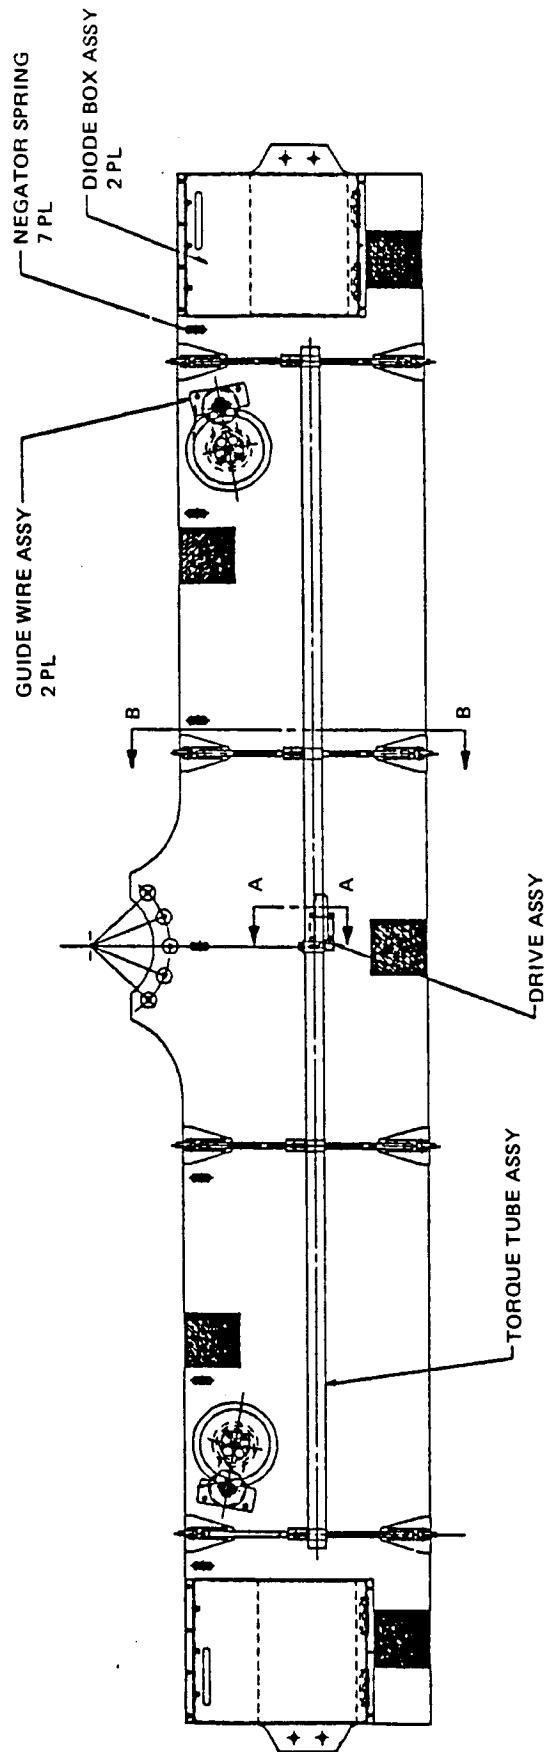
Stowed Blanket Preload/Release Torque Tube Mechanism (Plan View)
